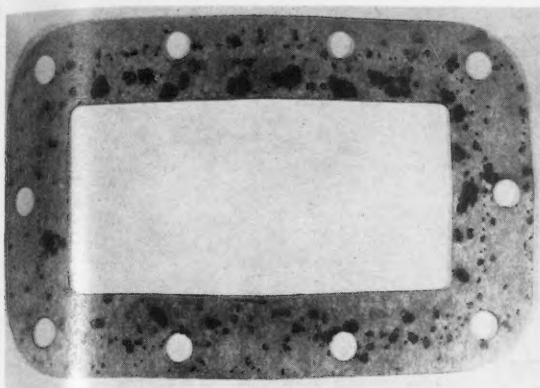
Pitting corrosion, Type 304 valve bonnet gasket.
